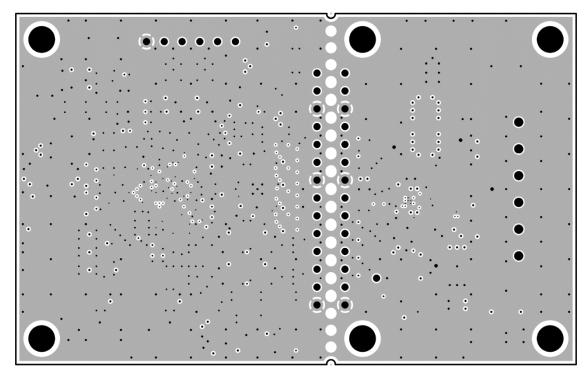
Layout view - Layer 2 - Internal - Ground (not to scale)
